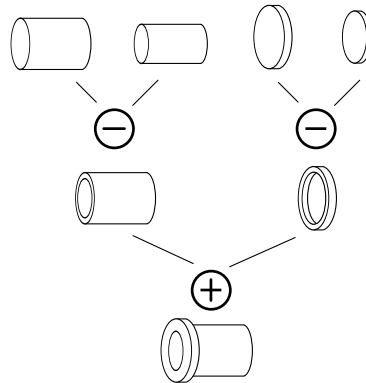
The figure shows how cylinders can be combined to form a pipe with a flange using Constructive Solid Geometry.
